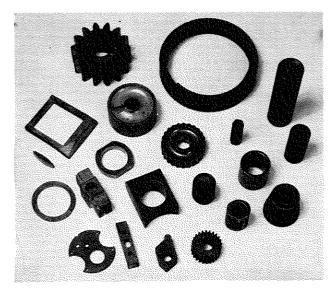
A display of typical powder metallurgy parts that were made by mechanically pressing in cavity dies.
